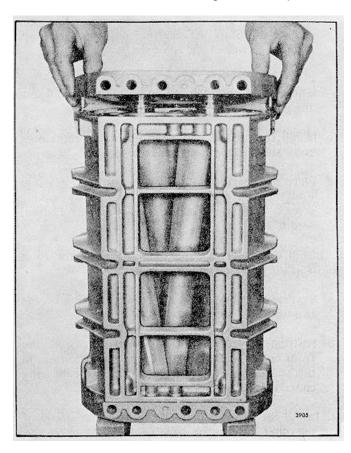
Installing Rear End Plate on Blower Rotors and Housing
